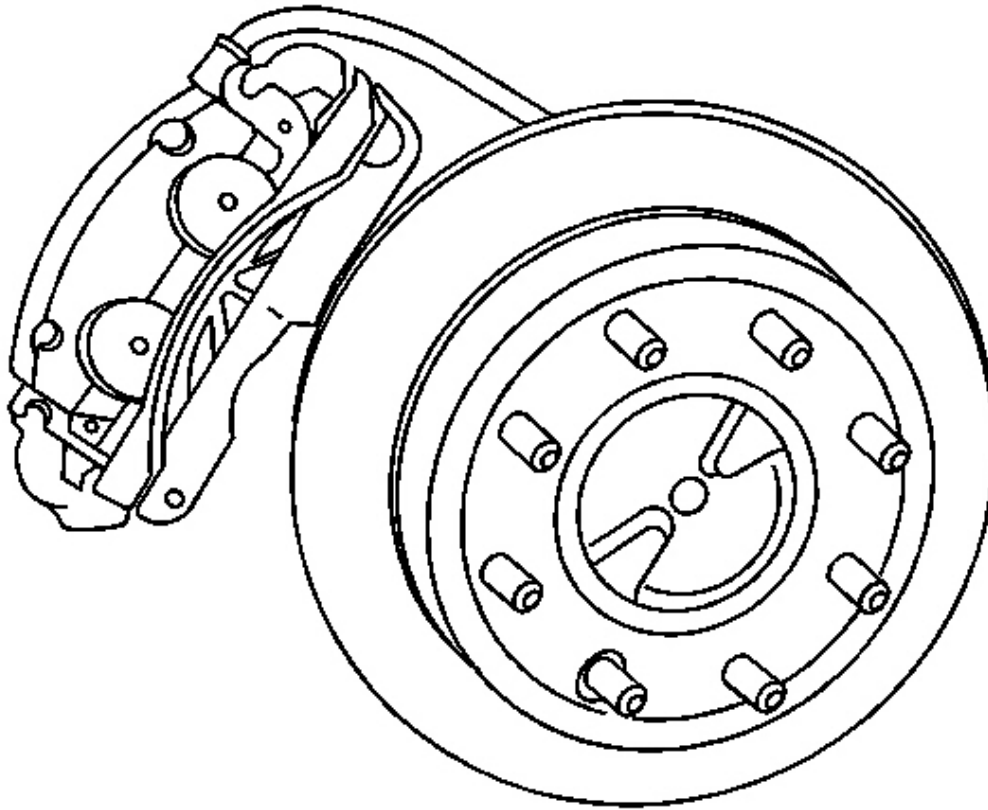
Brake Caliper & Bracket - Rear (Except Dual Wheels or NYS)
